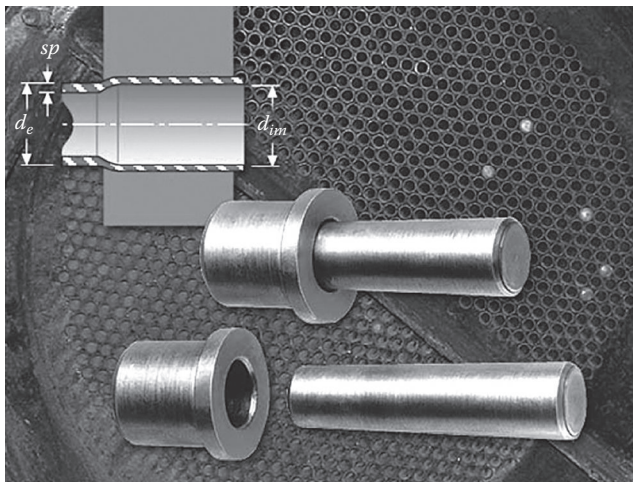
Tube plugs showing ring and a tapered pin. (Courtesy of Maus Italia F. Agostino & C.s.a.s., Bagnolo Cremasco (Cr), Italy.)
